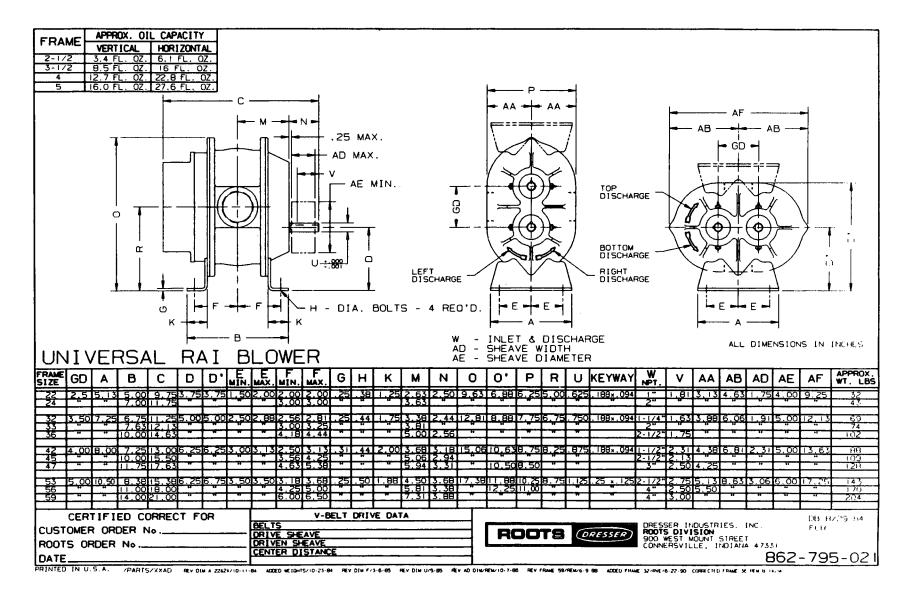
Dimensional Assembly of UNIVERSAL RAI® Blower (21/2"-5")
